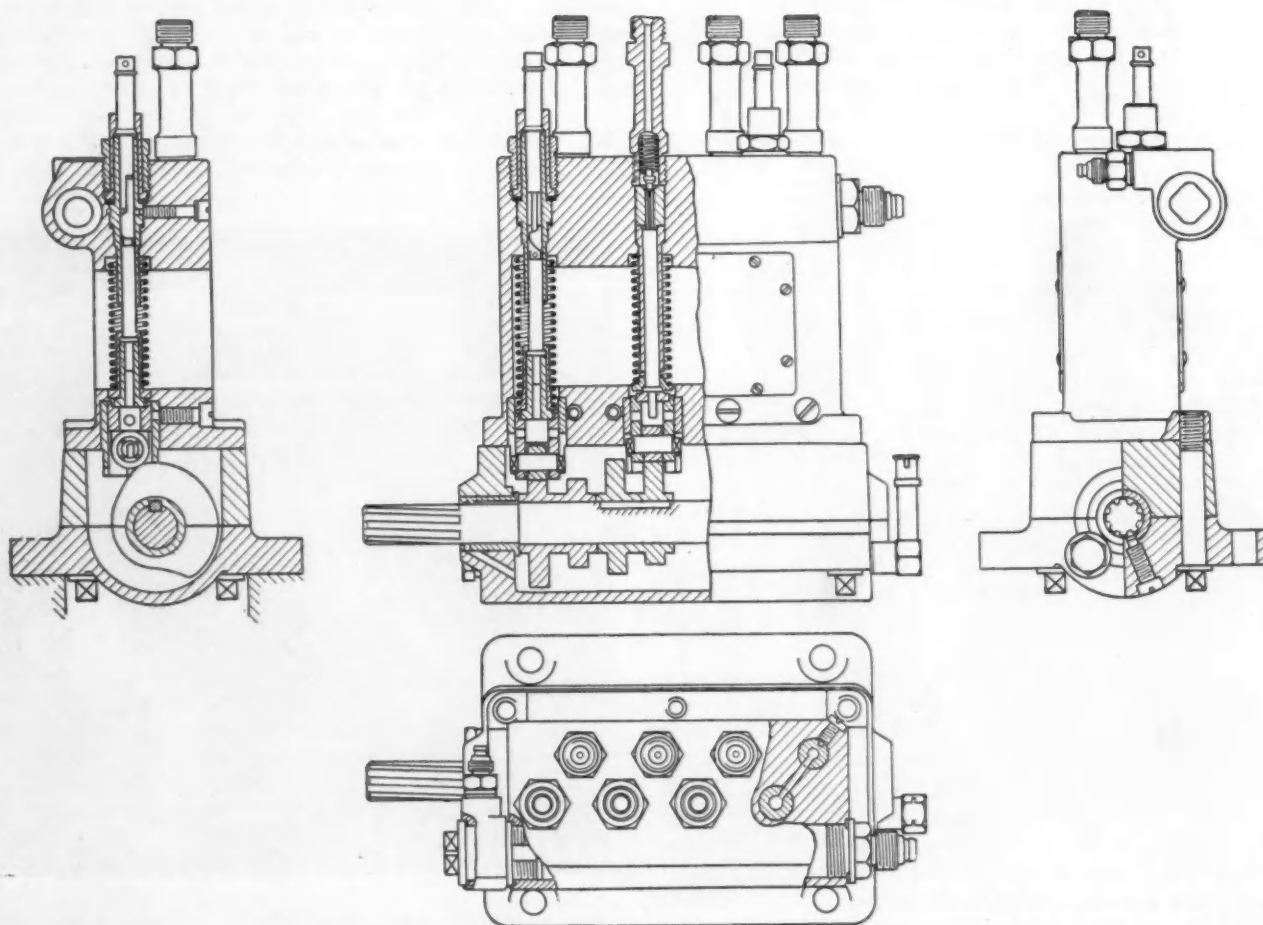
ASSEMBLY VIEWS OF THE M.A.N. MOTOR-TRUCK ENGINE
